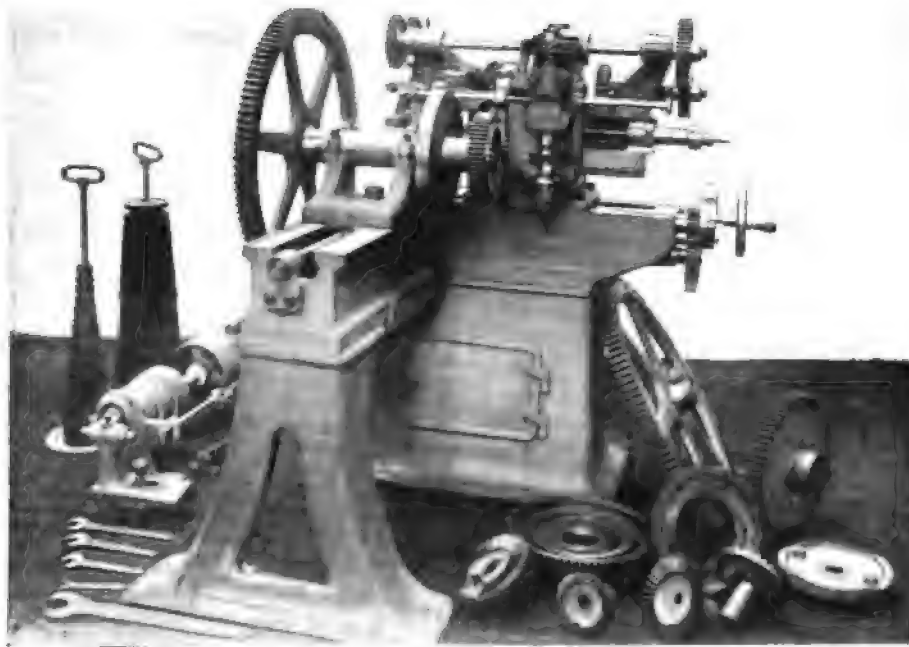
WHEEL CUTTING MACHINE. (G. Birch & Co.)
